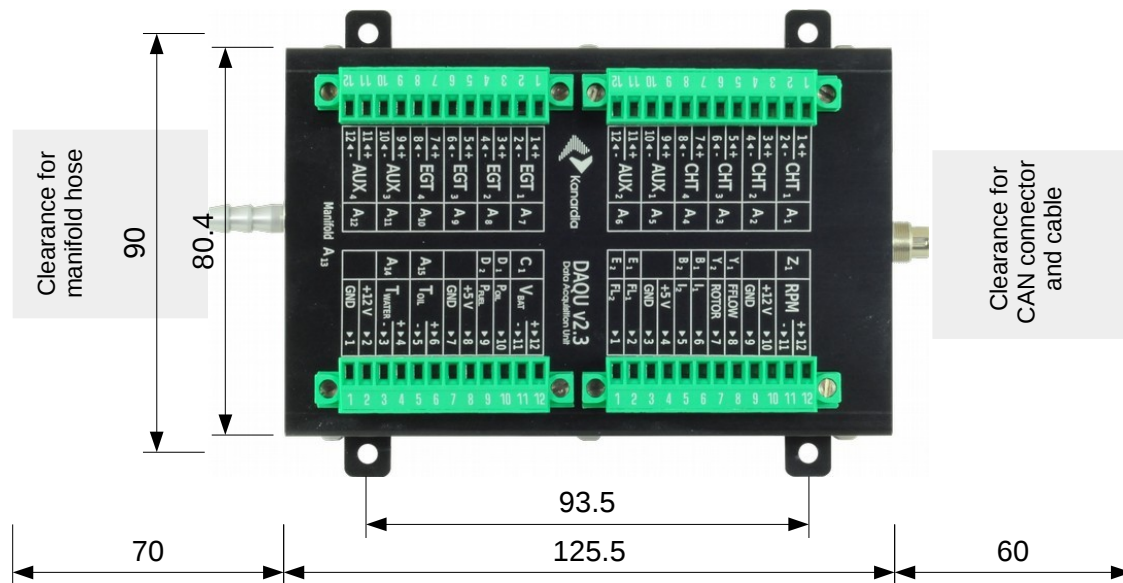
Dimensions and connection clearance of standard Daqu – Top View.
